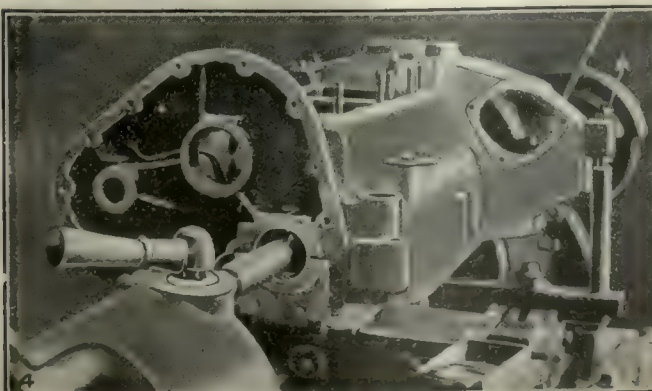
RE-BORING A CRANKCASE BEARING IN THE LATHE
